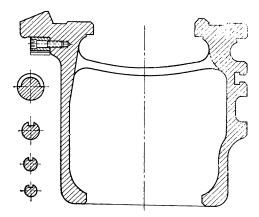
Cross section of the bed for the Krasny Proletary lathe
